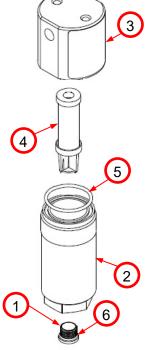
Filter head (3), filter bowl (2), element (4), bowl Oring (5), plug (1), plug O-ring (6).
